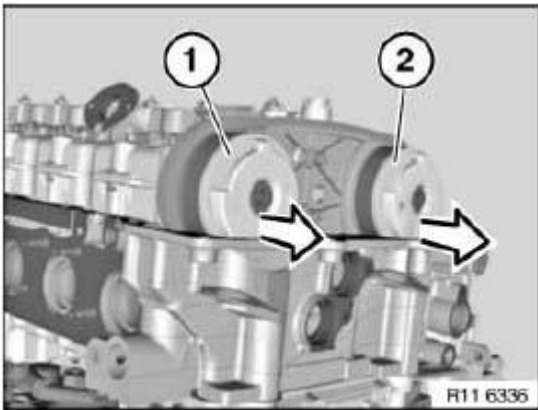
Identifying Engine Inlet And Exhaust Adjustment Unit
